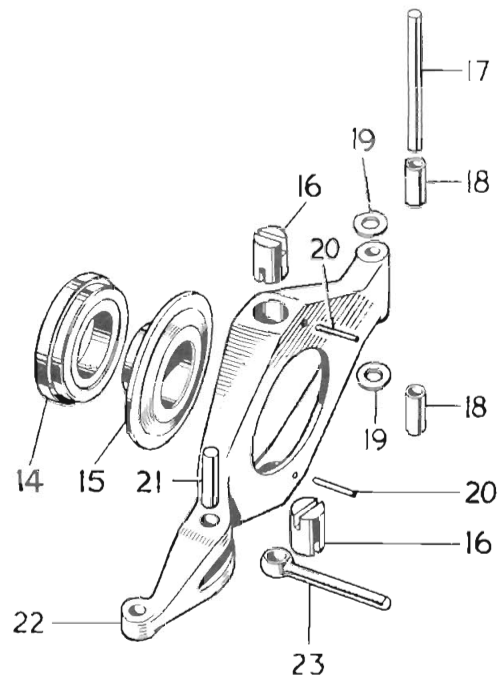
Exploded operating lever assembly (Herald 1200, 12/50 and Spitfire)
